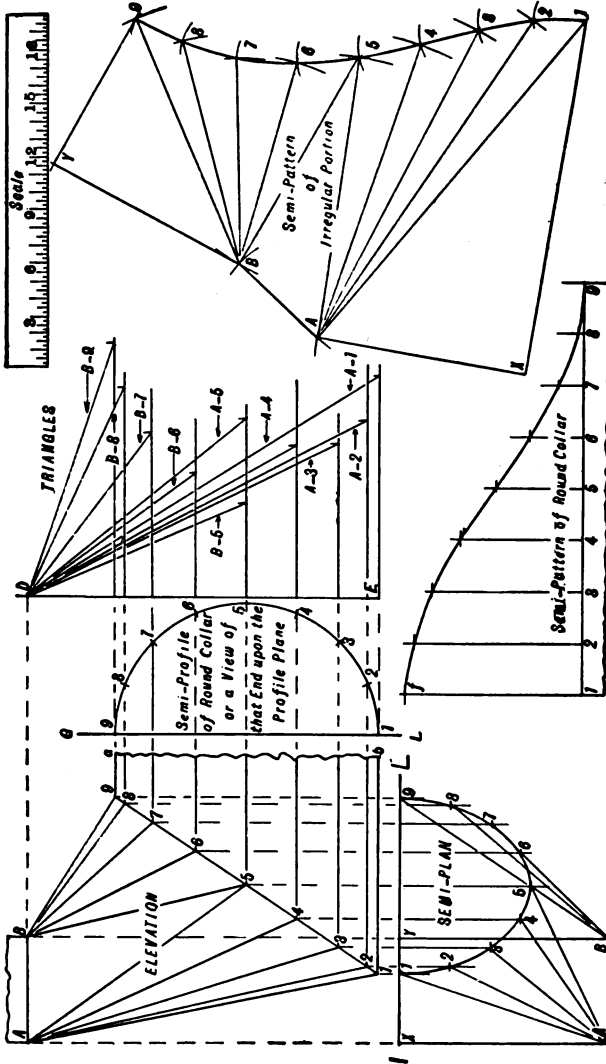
Plan, Elevation and Semi-pattern for a Transition Elbow
